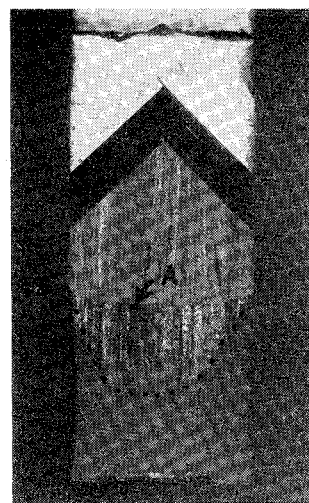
Crack tunneling in a 0.25-in.-thick compact tension specimen of Ti-4Al-3Mo-1V alloy as observed after failure under sustained load.¹⁶ 8X. Initial fatigue crack position marked A. Extent of subcritical crack growth prior to a final unstable fracture shown by dotted line.
